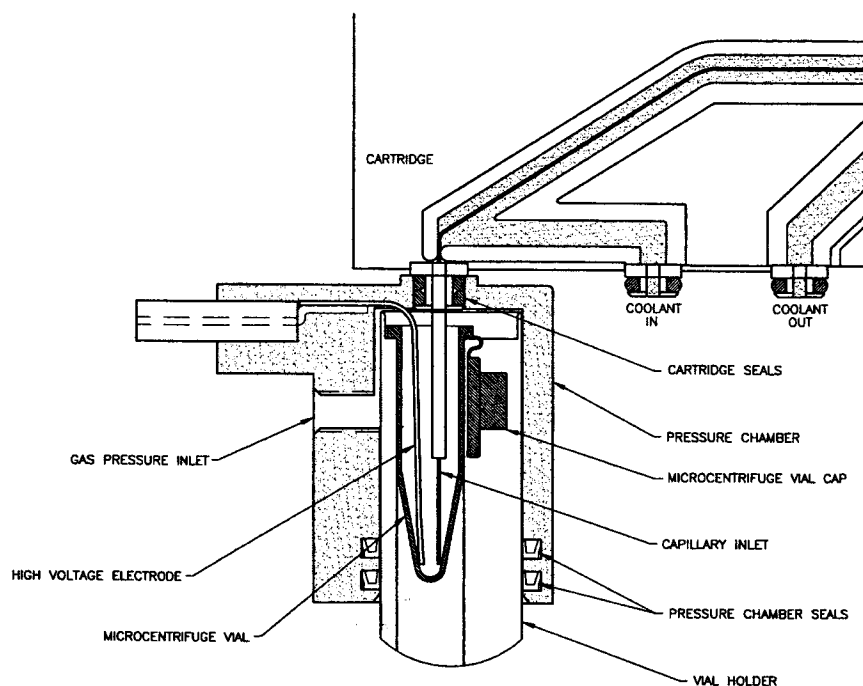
Inlet Electrode/Pressure Chamber Assembly Cross Section
